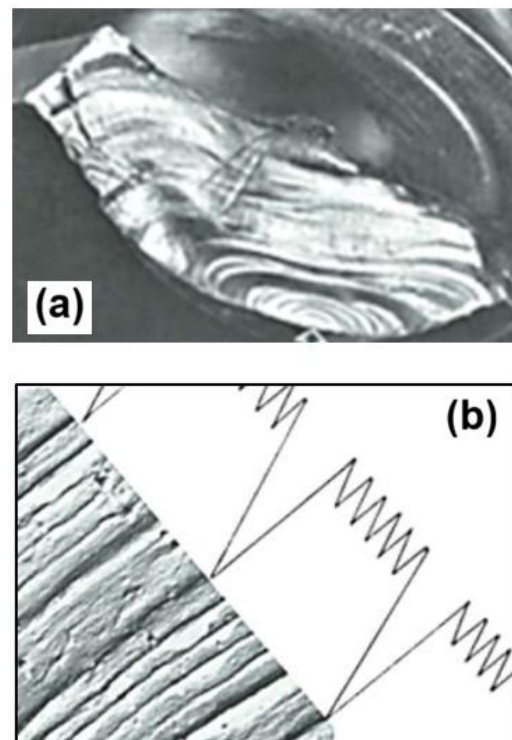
Adapted from [6]: (a) example of fatigue fracture; and, (b) load striations.
